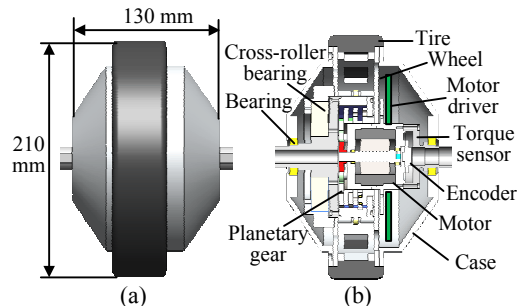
In-wheel motor: (a) size, and (b) structure.
